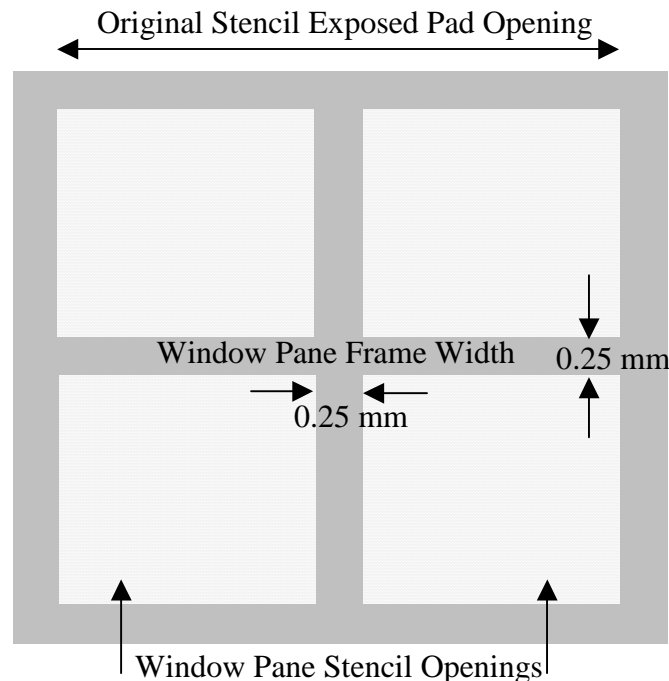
Reduced Solder Stencil Aperture for Exterior of Exposed Pad
